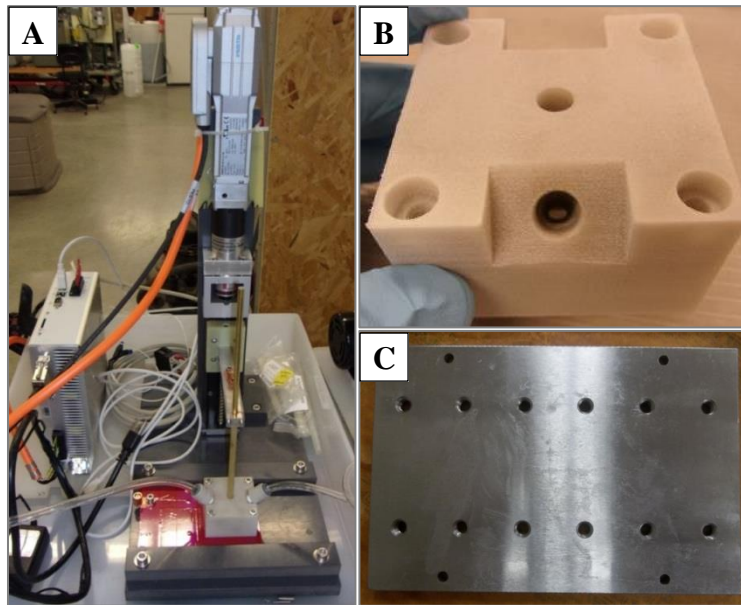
(A) Photograph of the fully commissioned ECM apparatus, with rod tool, motor controller, and fluidic connections to the flow module. Close-up photographs of (B) the 3-D printed flow module and (C) an alloy steel ECM part.
